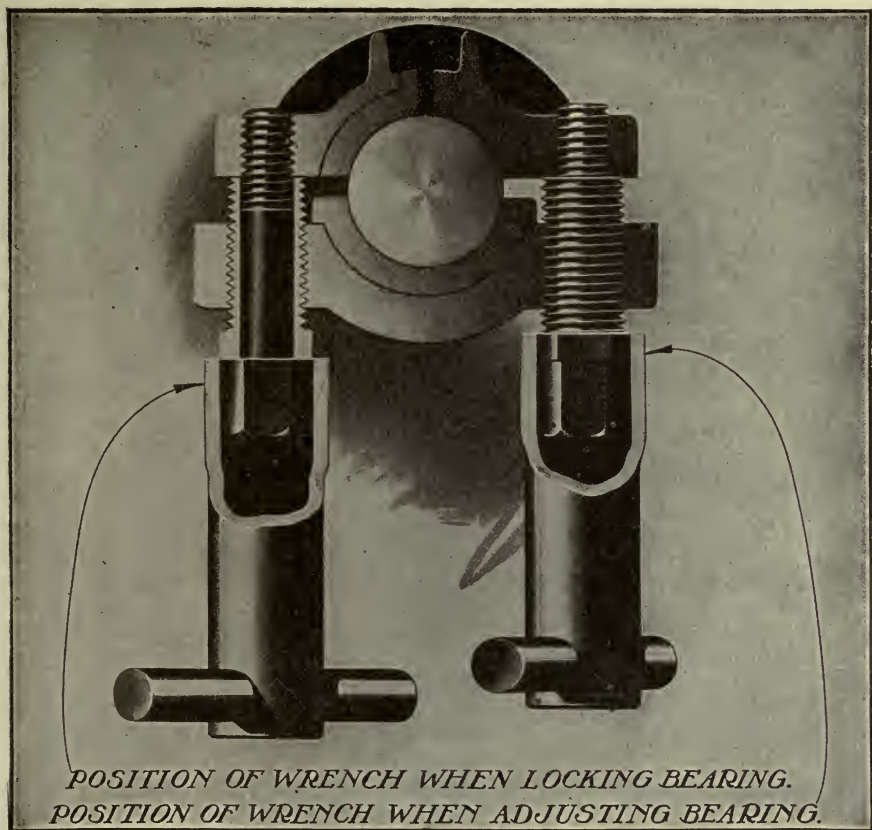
Adjusting Main Engine Bearings, Earlier Models (Reo).
